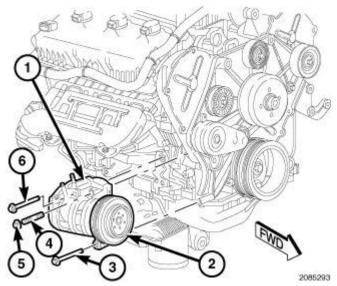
Removing/Installing A/C Compressor Courtesy of CHRYSLER LLC
